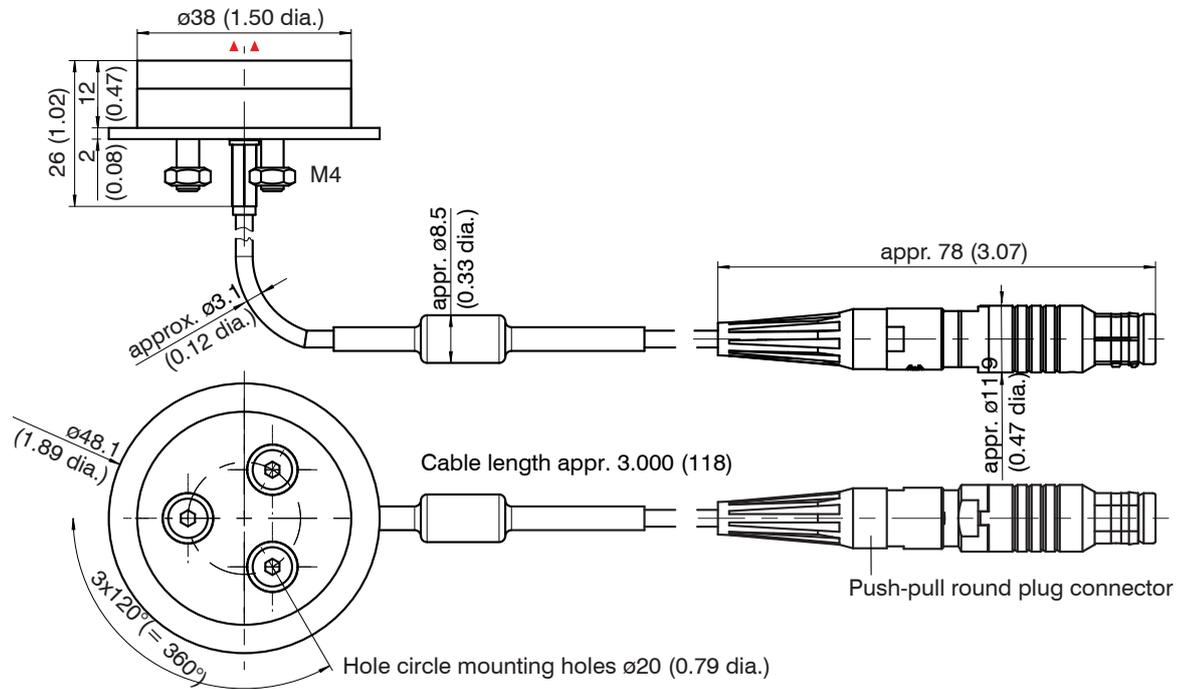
Dimensions EPU15, dimensions in mm (inches), not to scale
